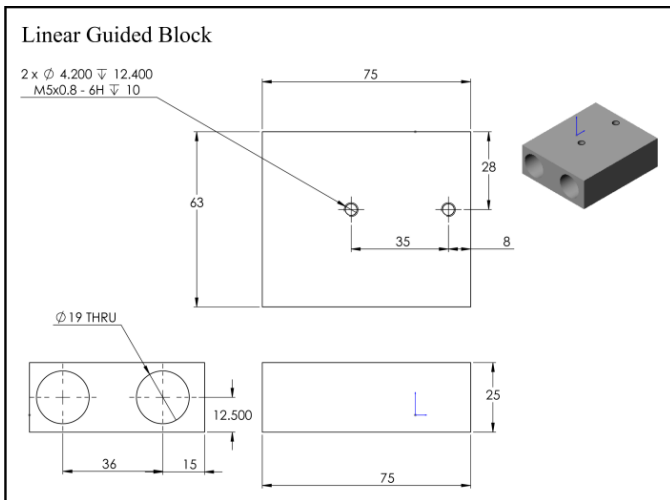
Linear Guided Block-cum Mounting Plate Base
